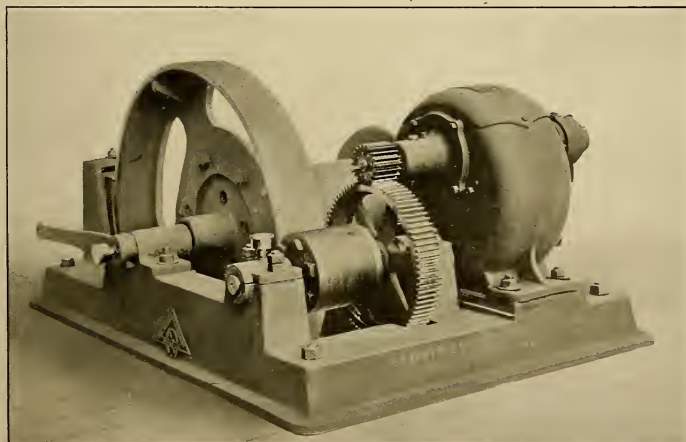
ONE H. P. MOTOR DRIVING A HOIST MADE BY THE DENVER ENGINEERING WORKS CO., DENVER, COL.
